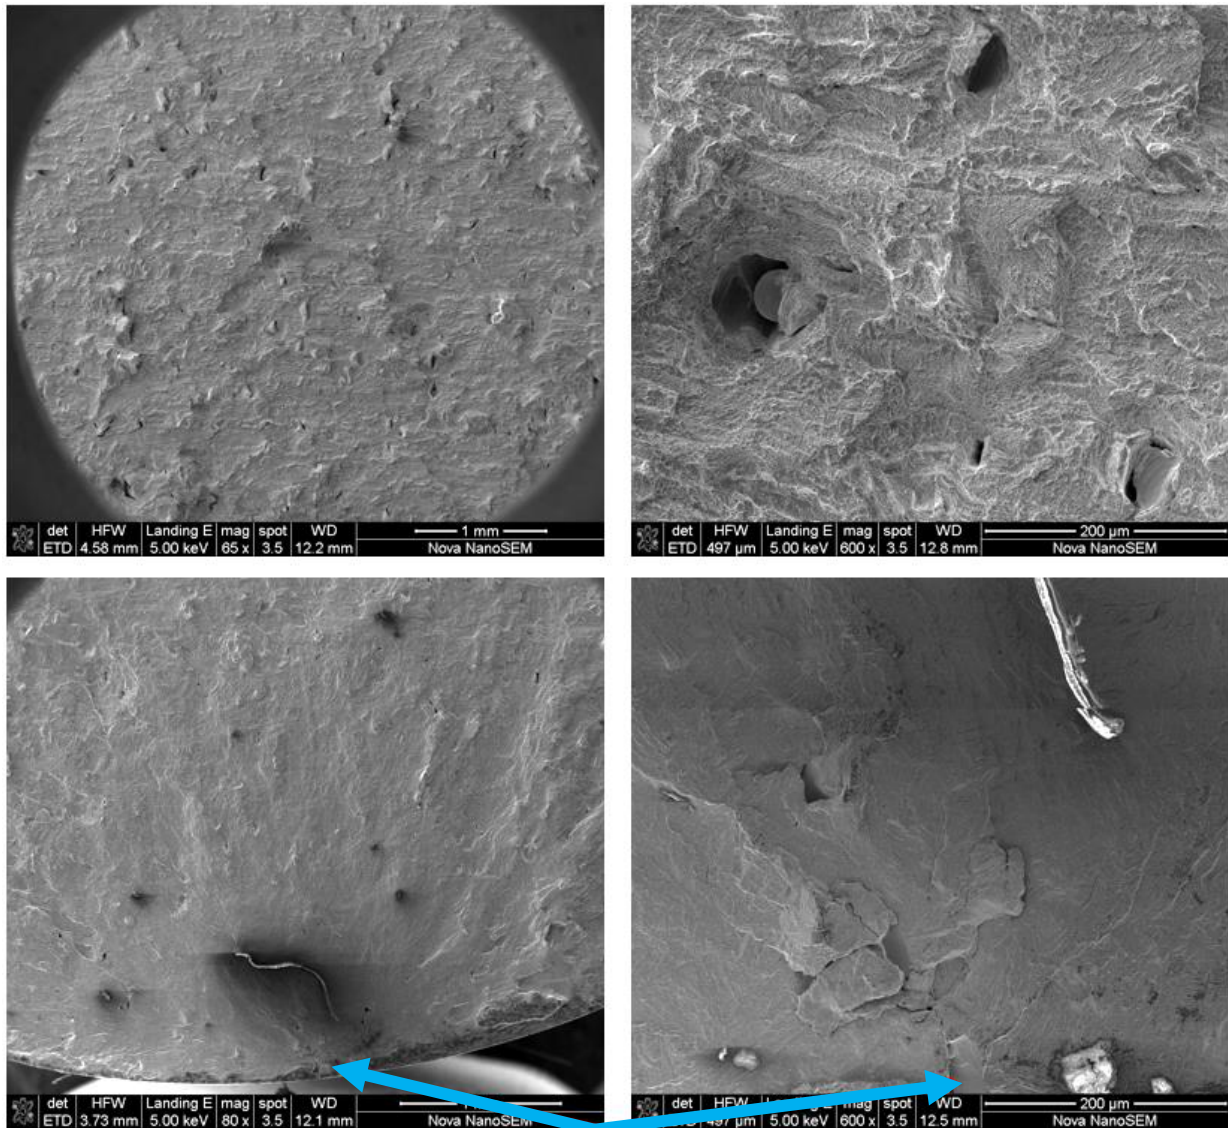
Fractured surfaces of a stressed relieved SLM Ti6Al4V 3-point bend fatigue sample fabricated at 3 m/s (first sample)
